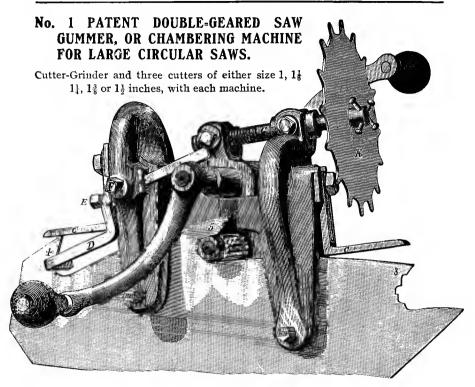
ADJUSTED TO GUM MILL OR MULAY SAWS.
